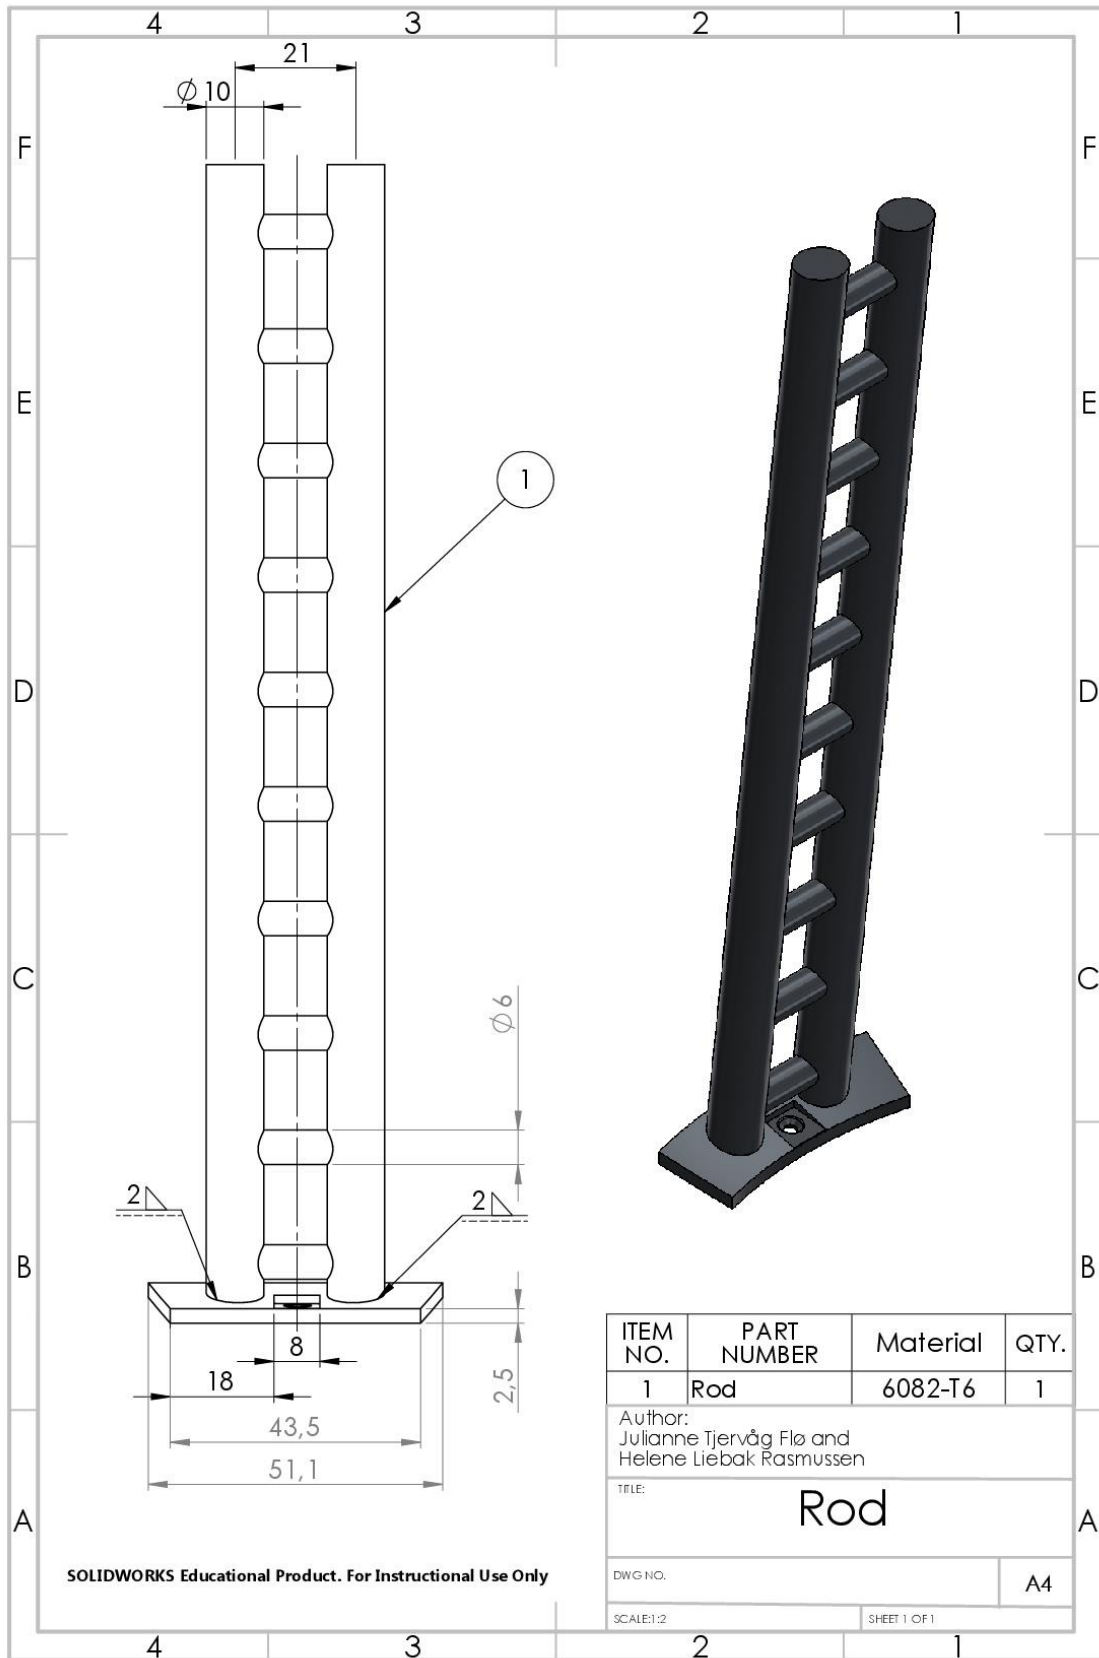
Technical drawing of the rod. Created in SolidWorks.
